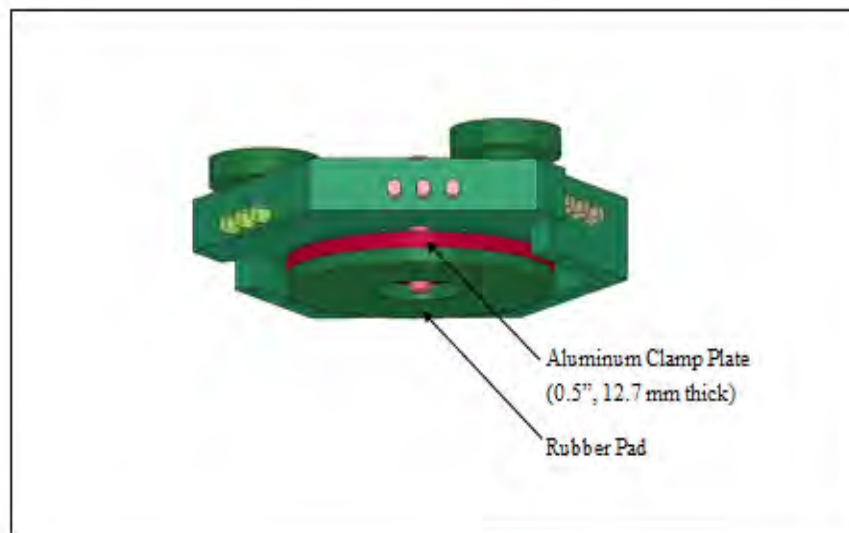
Traveller VVER Top Plate Assembly Showing Integral Axial Clamp and Rubber Pad
